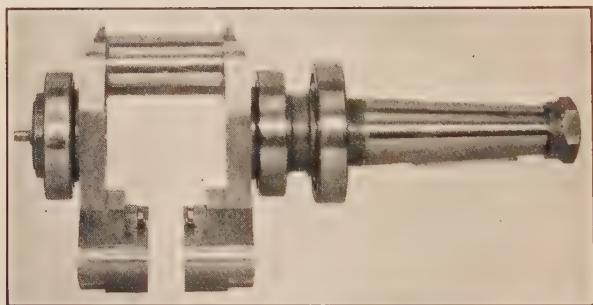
Solid one-piece, ball bearing crankshaft.
